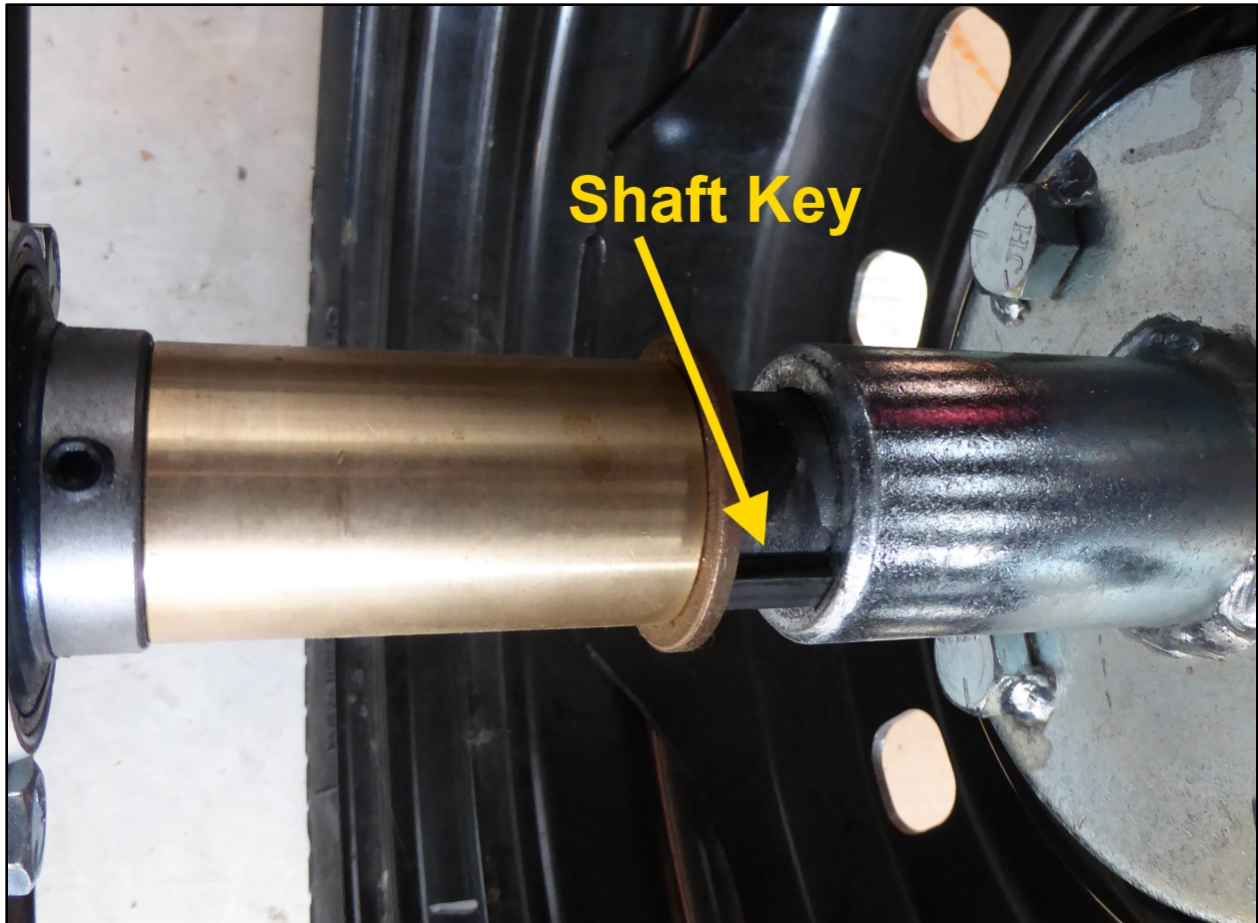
The driver side right wheel is keyed to the shaft. It is driven.
